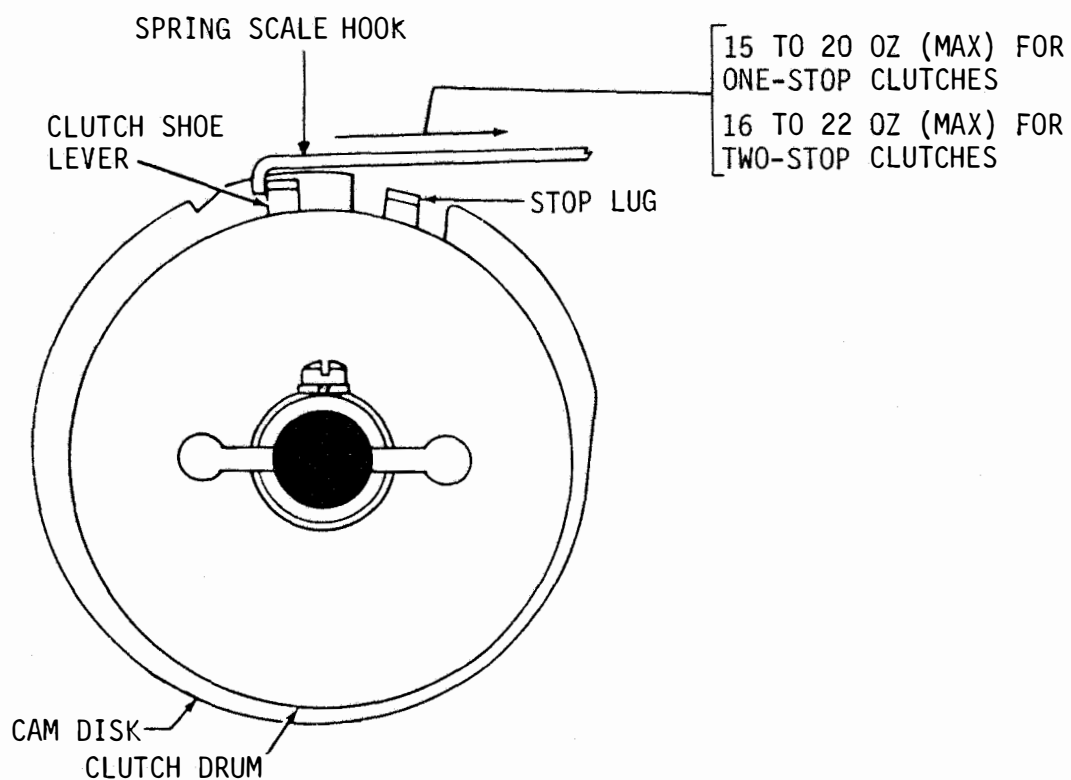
Clutch Shoe Lever Spring and Clutch Drum Position (Except Selector), Right Side View
